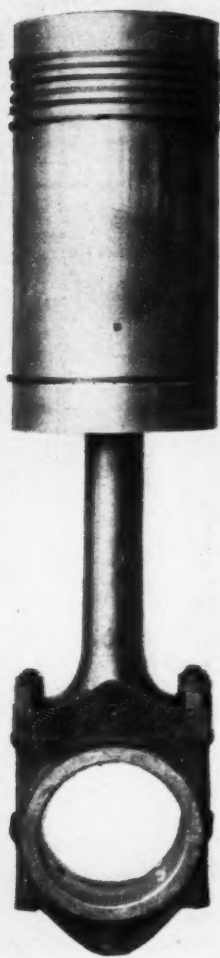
(Left)—An eighteen-inch aluminum piston. Employment of light alloys is desirable for large reciprocating parts such as this to reduce kinetic forces. The connecting rod is of light tubular section, in steel. Fig. 4—(Below) — Cold valve cages, valves and parts. Valves usually are made from high chromium, high nickel steels
